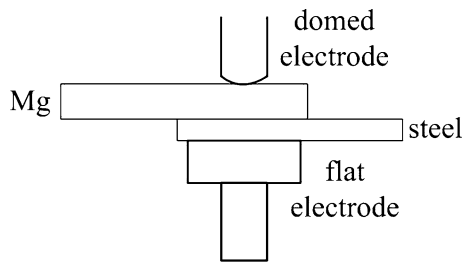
Schematic diagram of workpieces and electrodes for welding.
